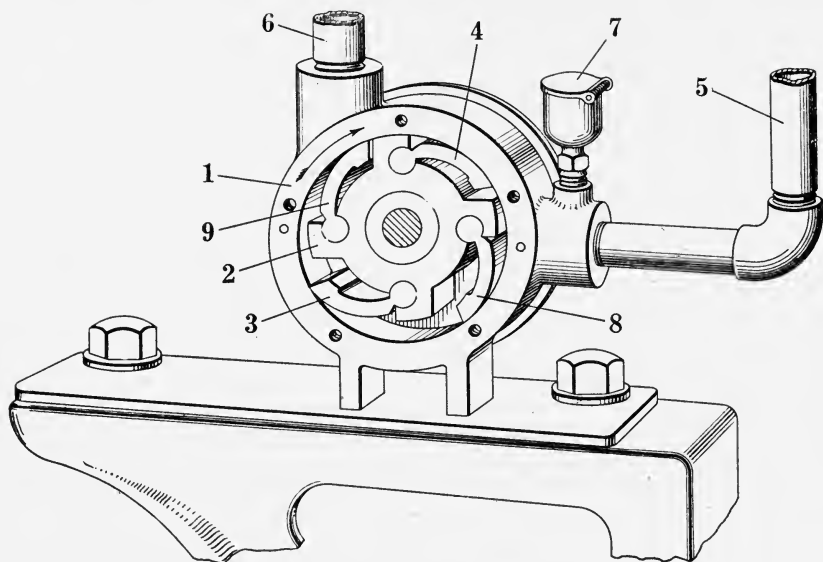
Interior View of the Mold Cooling Equipment Pump Body, 1, showing the arrangement of the compressor blades 3, 4, 8 and 9. These blades while revolving compress the air and force it through the outlet pipe 6, from which point it passes into a trap or oil separator cylinder mounted within the machine column and out again until it reaches a nozzle mounted on the frame of the machine above and to the right of the mold disk. The nozzle is positioned in such a way that as the air is expelled, it is directed lengthwise over the face of the mold body and the mold cap.
